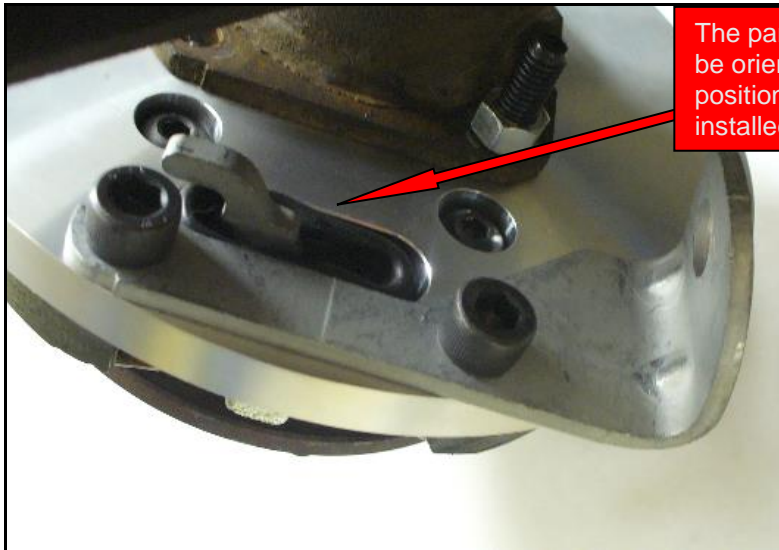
Park brake assembly installed on the vehicle (Inboard View)
